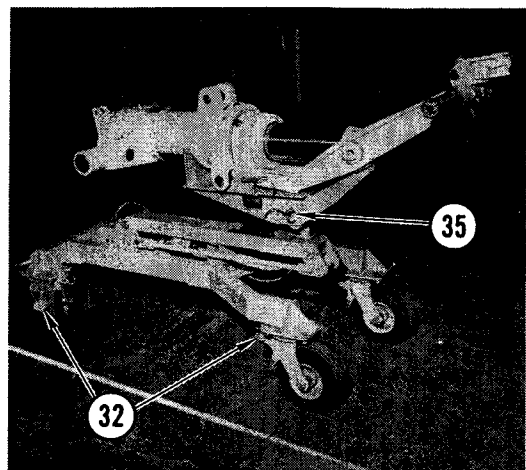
Nose Gear Shock Strut Removal and Installation (Sheet 1)
